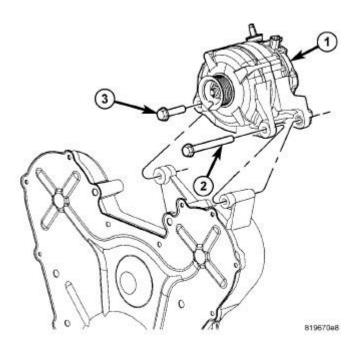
Generator & Mounting Bolts Courtesy of CHRYSLER LLC
